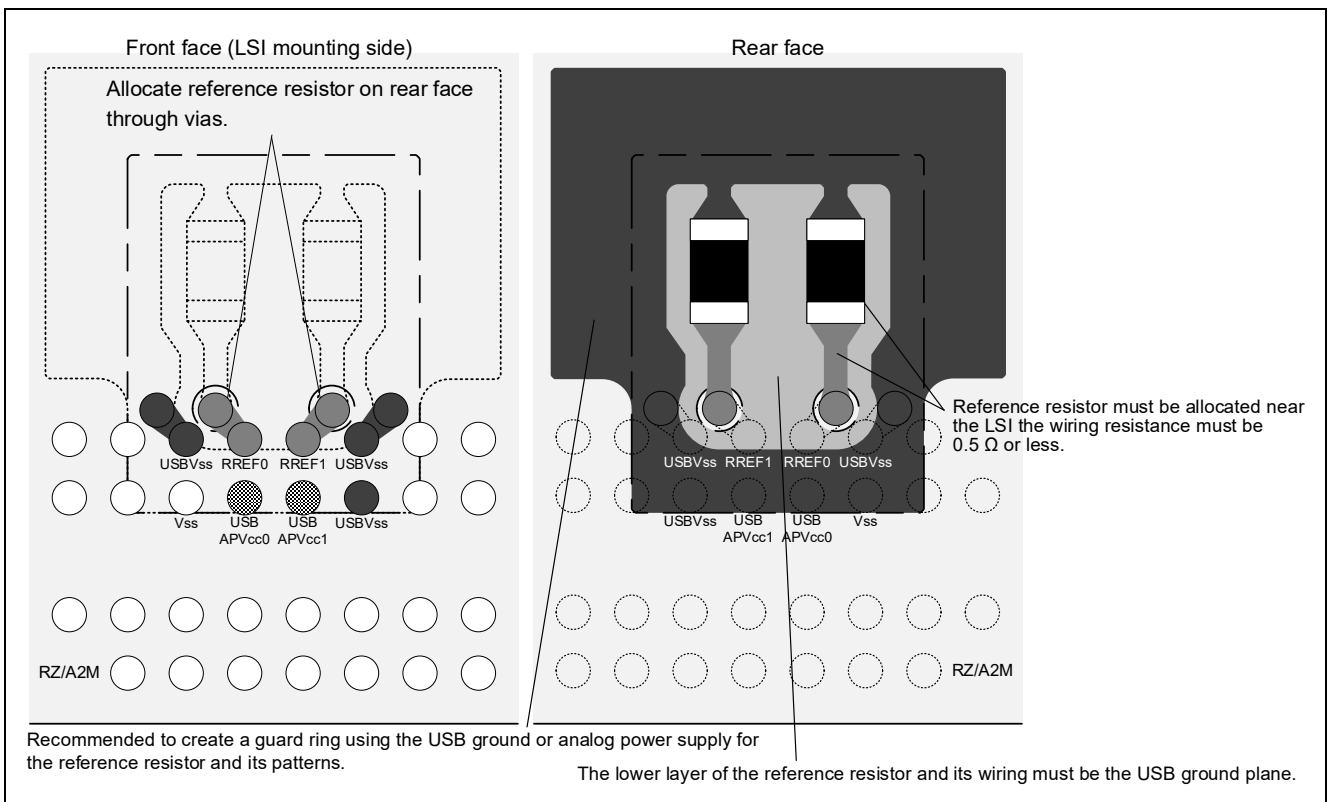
RREF pin vicinity pattern design example 2 (256 pin BGA package)
